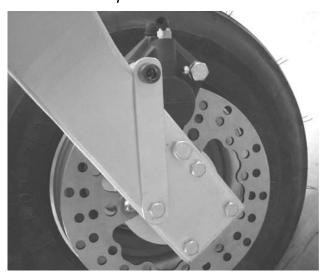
brake calliper mounting. Note bolts are usually the other way round, heads towards the wheel which keeps the threads away from the axle flange.
